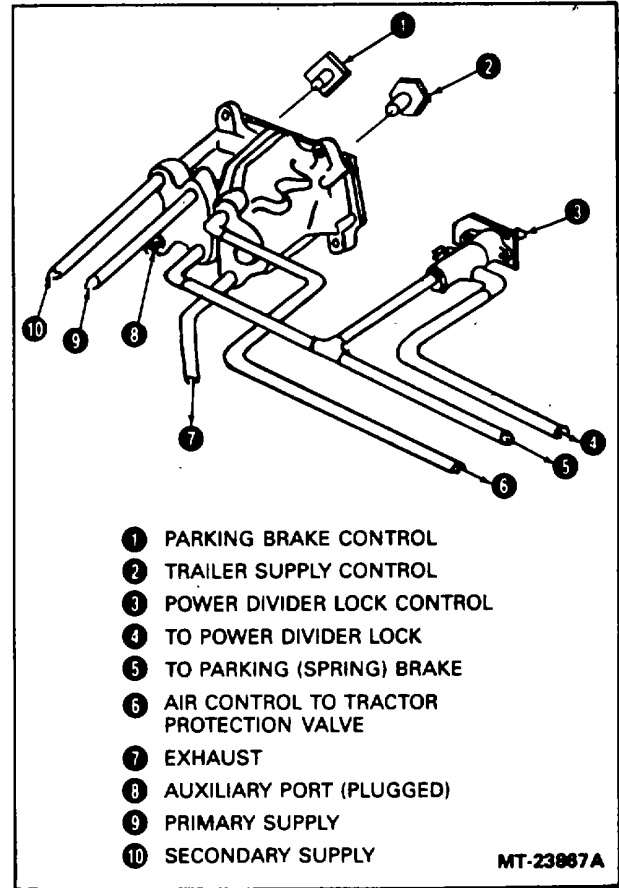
Power Divider Lock Air Shift Control With Modular Control Valve For Spring Brakes and Tractor Protection Control Valve
